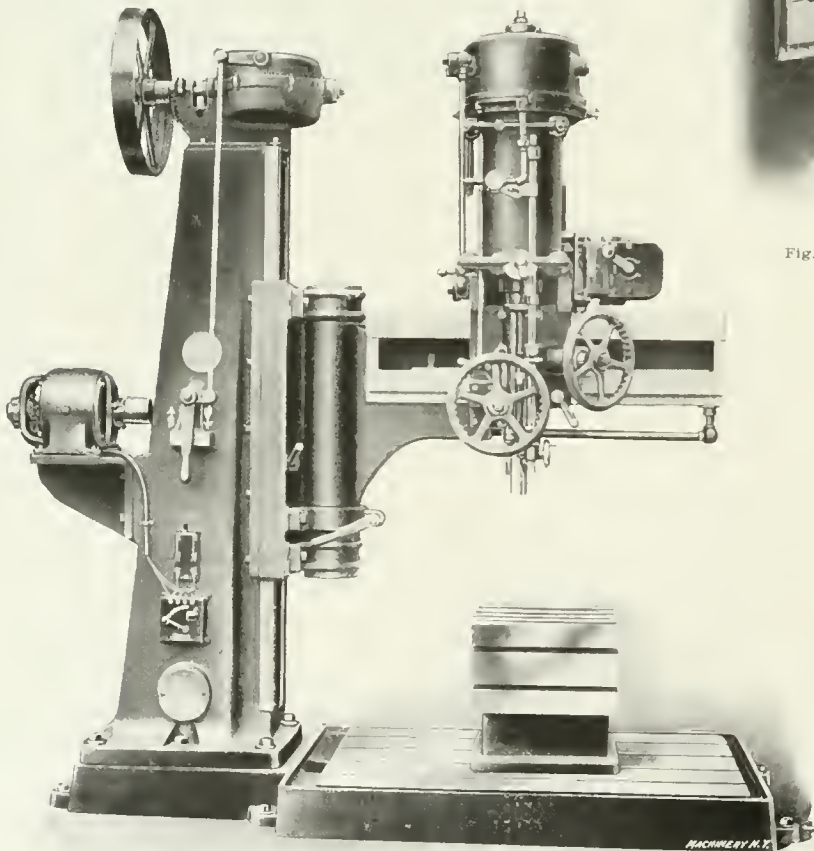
Hydro-pneumatic Radial Drilling Machine brought out by the Walter H. Foster Co.
